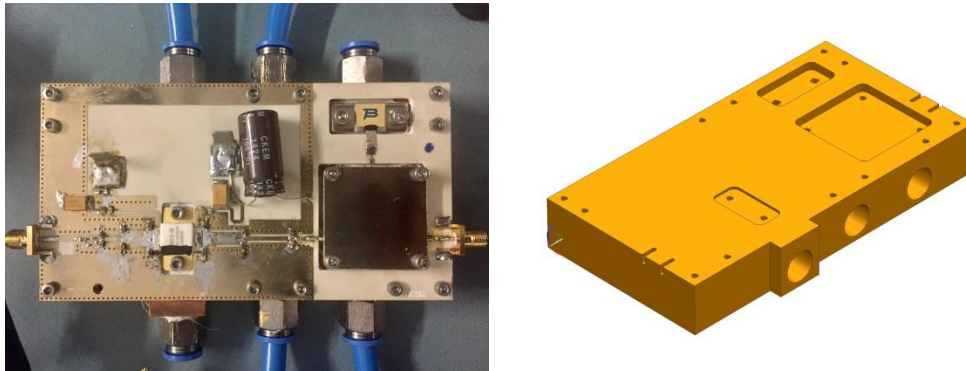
Top view of the prototyped PA v1 on the copper base plate (left), 3D view of the designed copper base plate (right).
